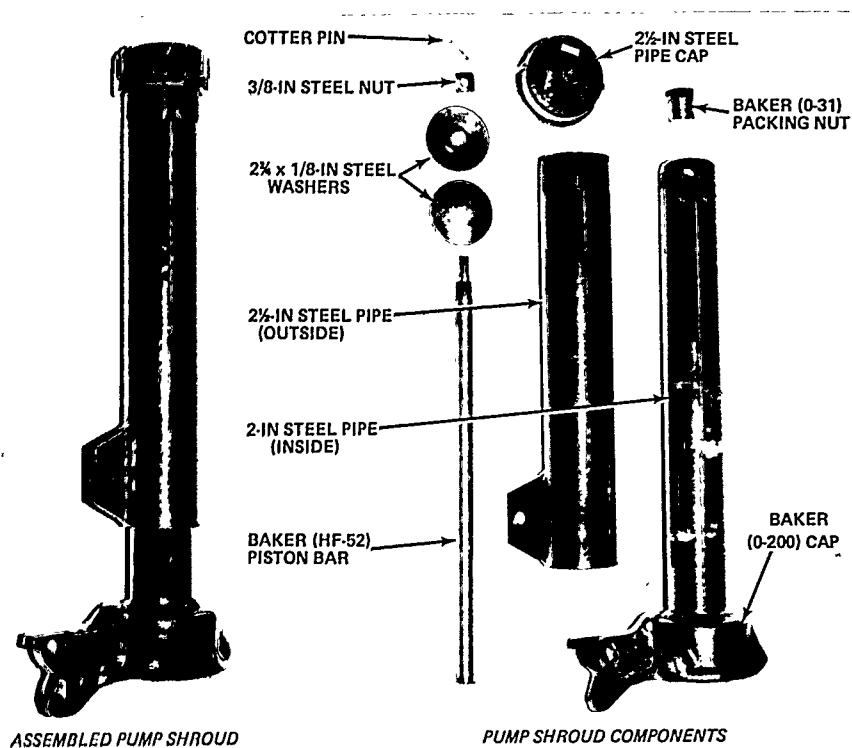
Assembled hand pump shroud (left) and components for assembly (right).
